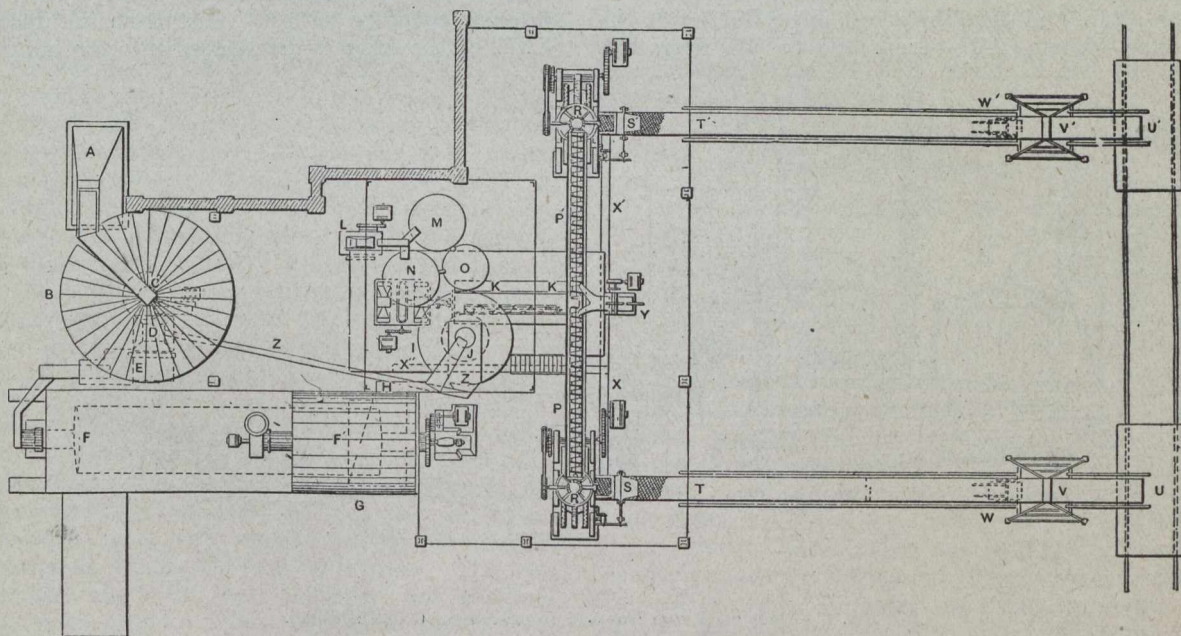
Plant of United Gas and Improvement Co., Philadelphia (Plan)
